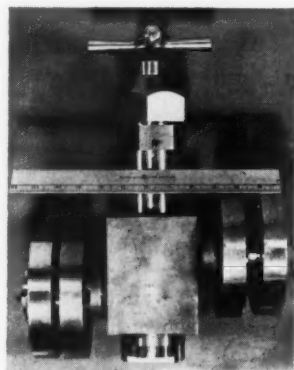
MAROTTA 2-IN. HYDRAULICALLY OPERATED VALVE
